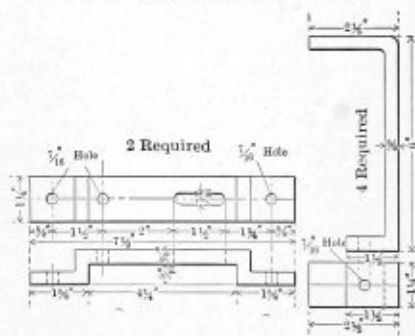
DETAILS OF CLAMP AND UPRIGHTS.
